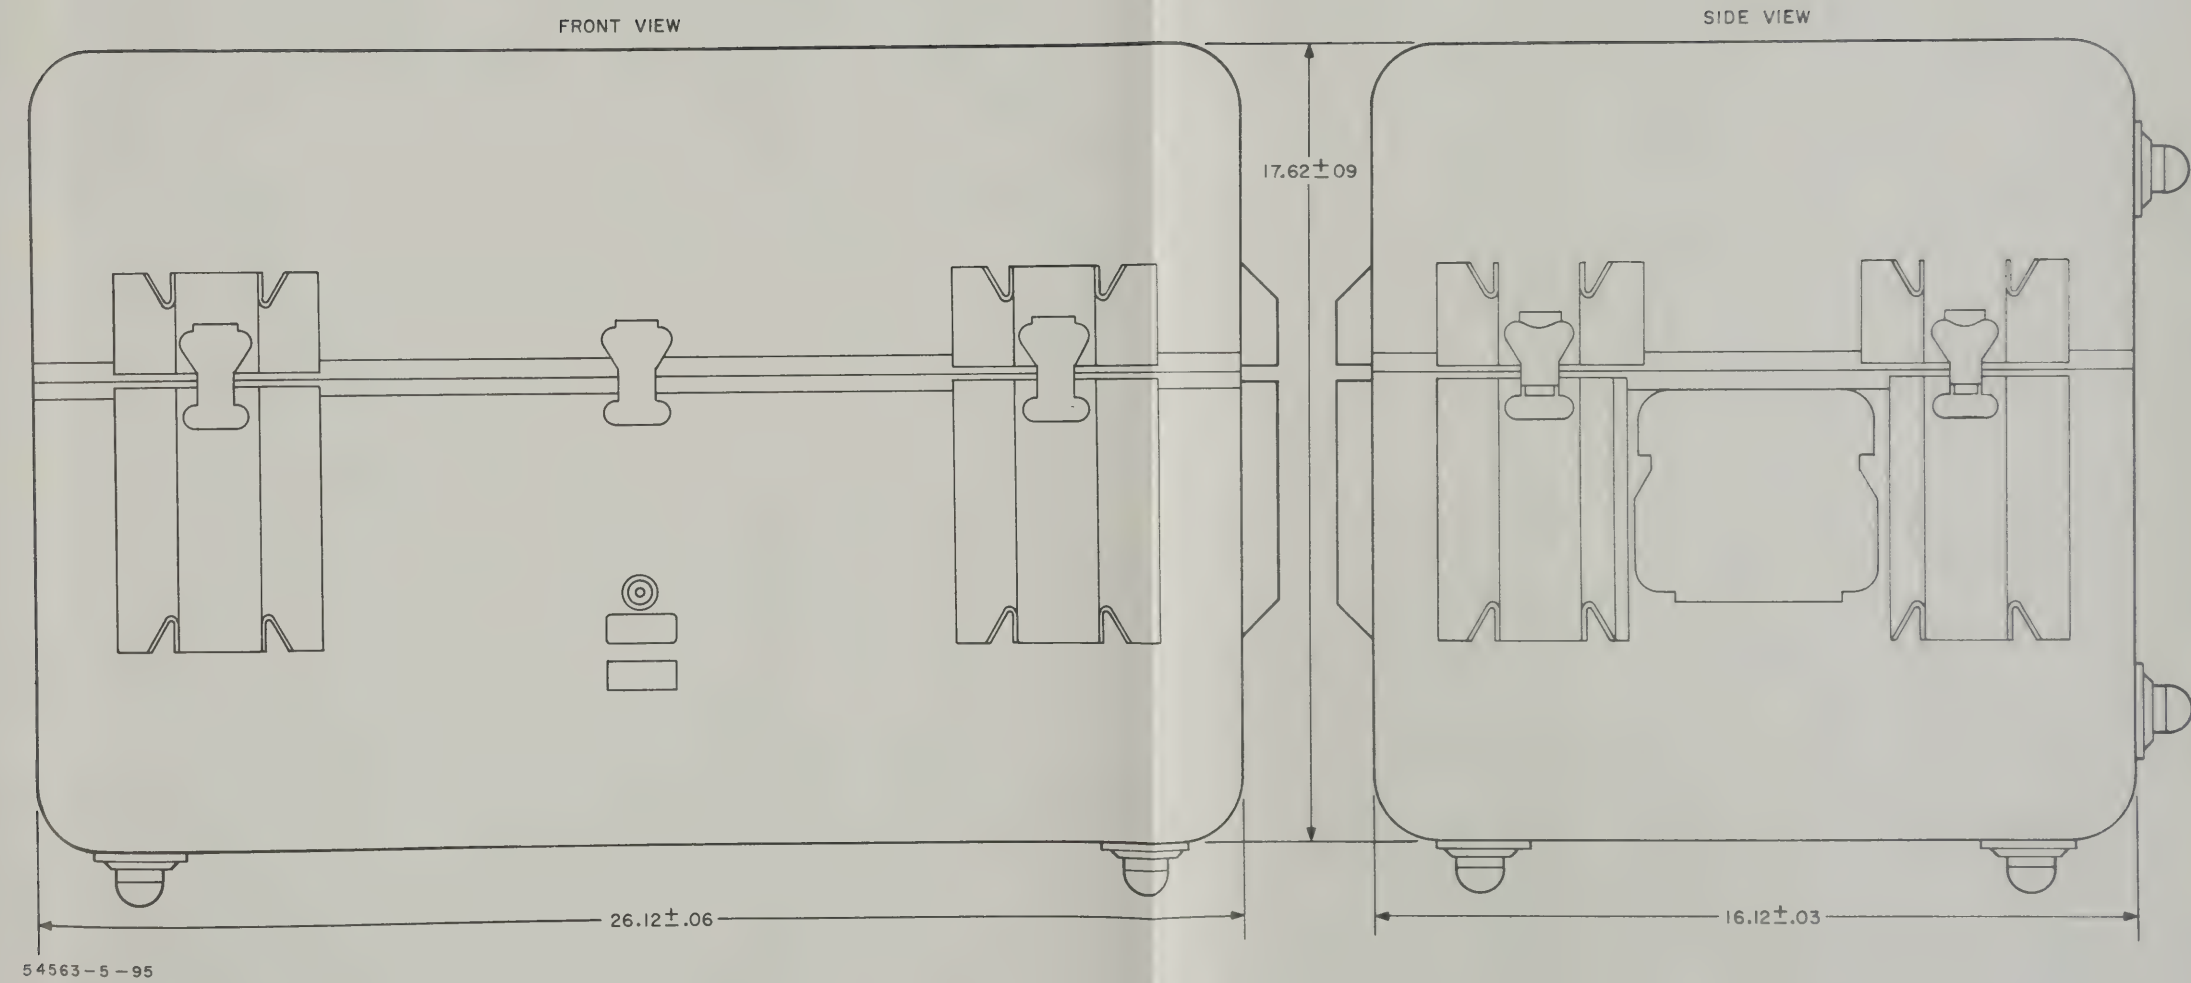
Test Set Coupler, MX-8154/TYA-11, Installation Drawing
